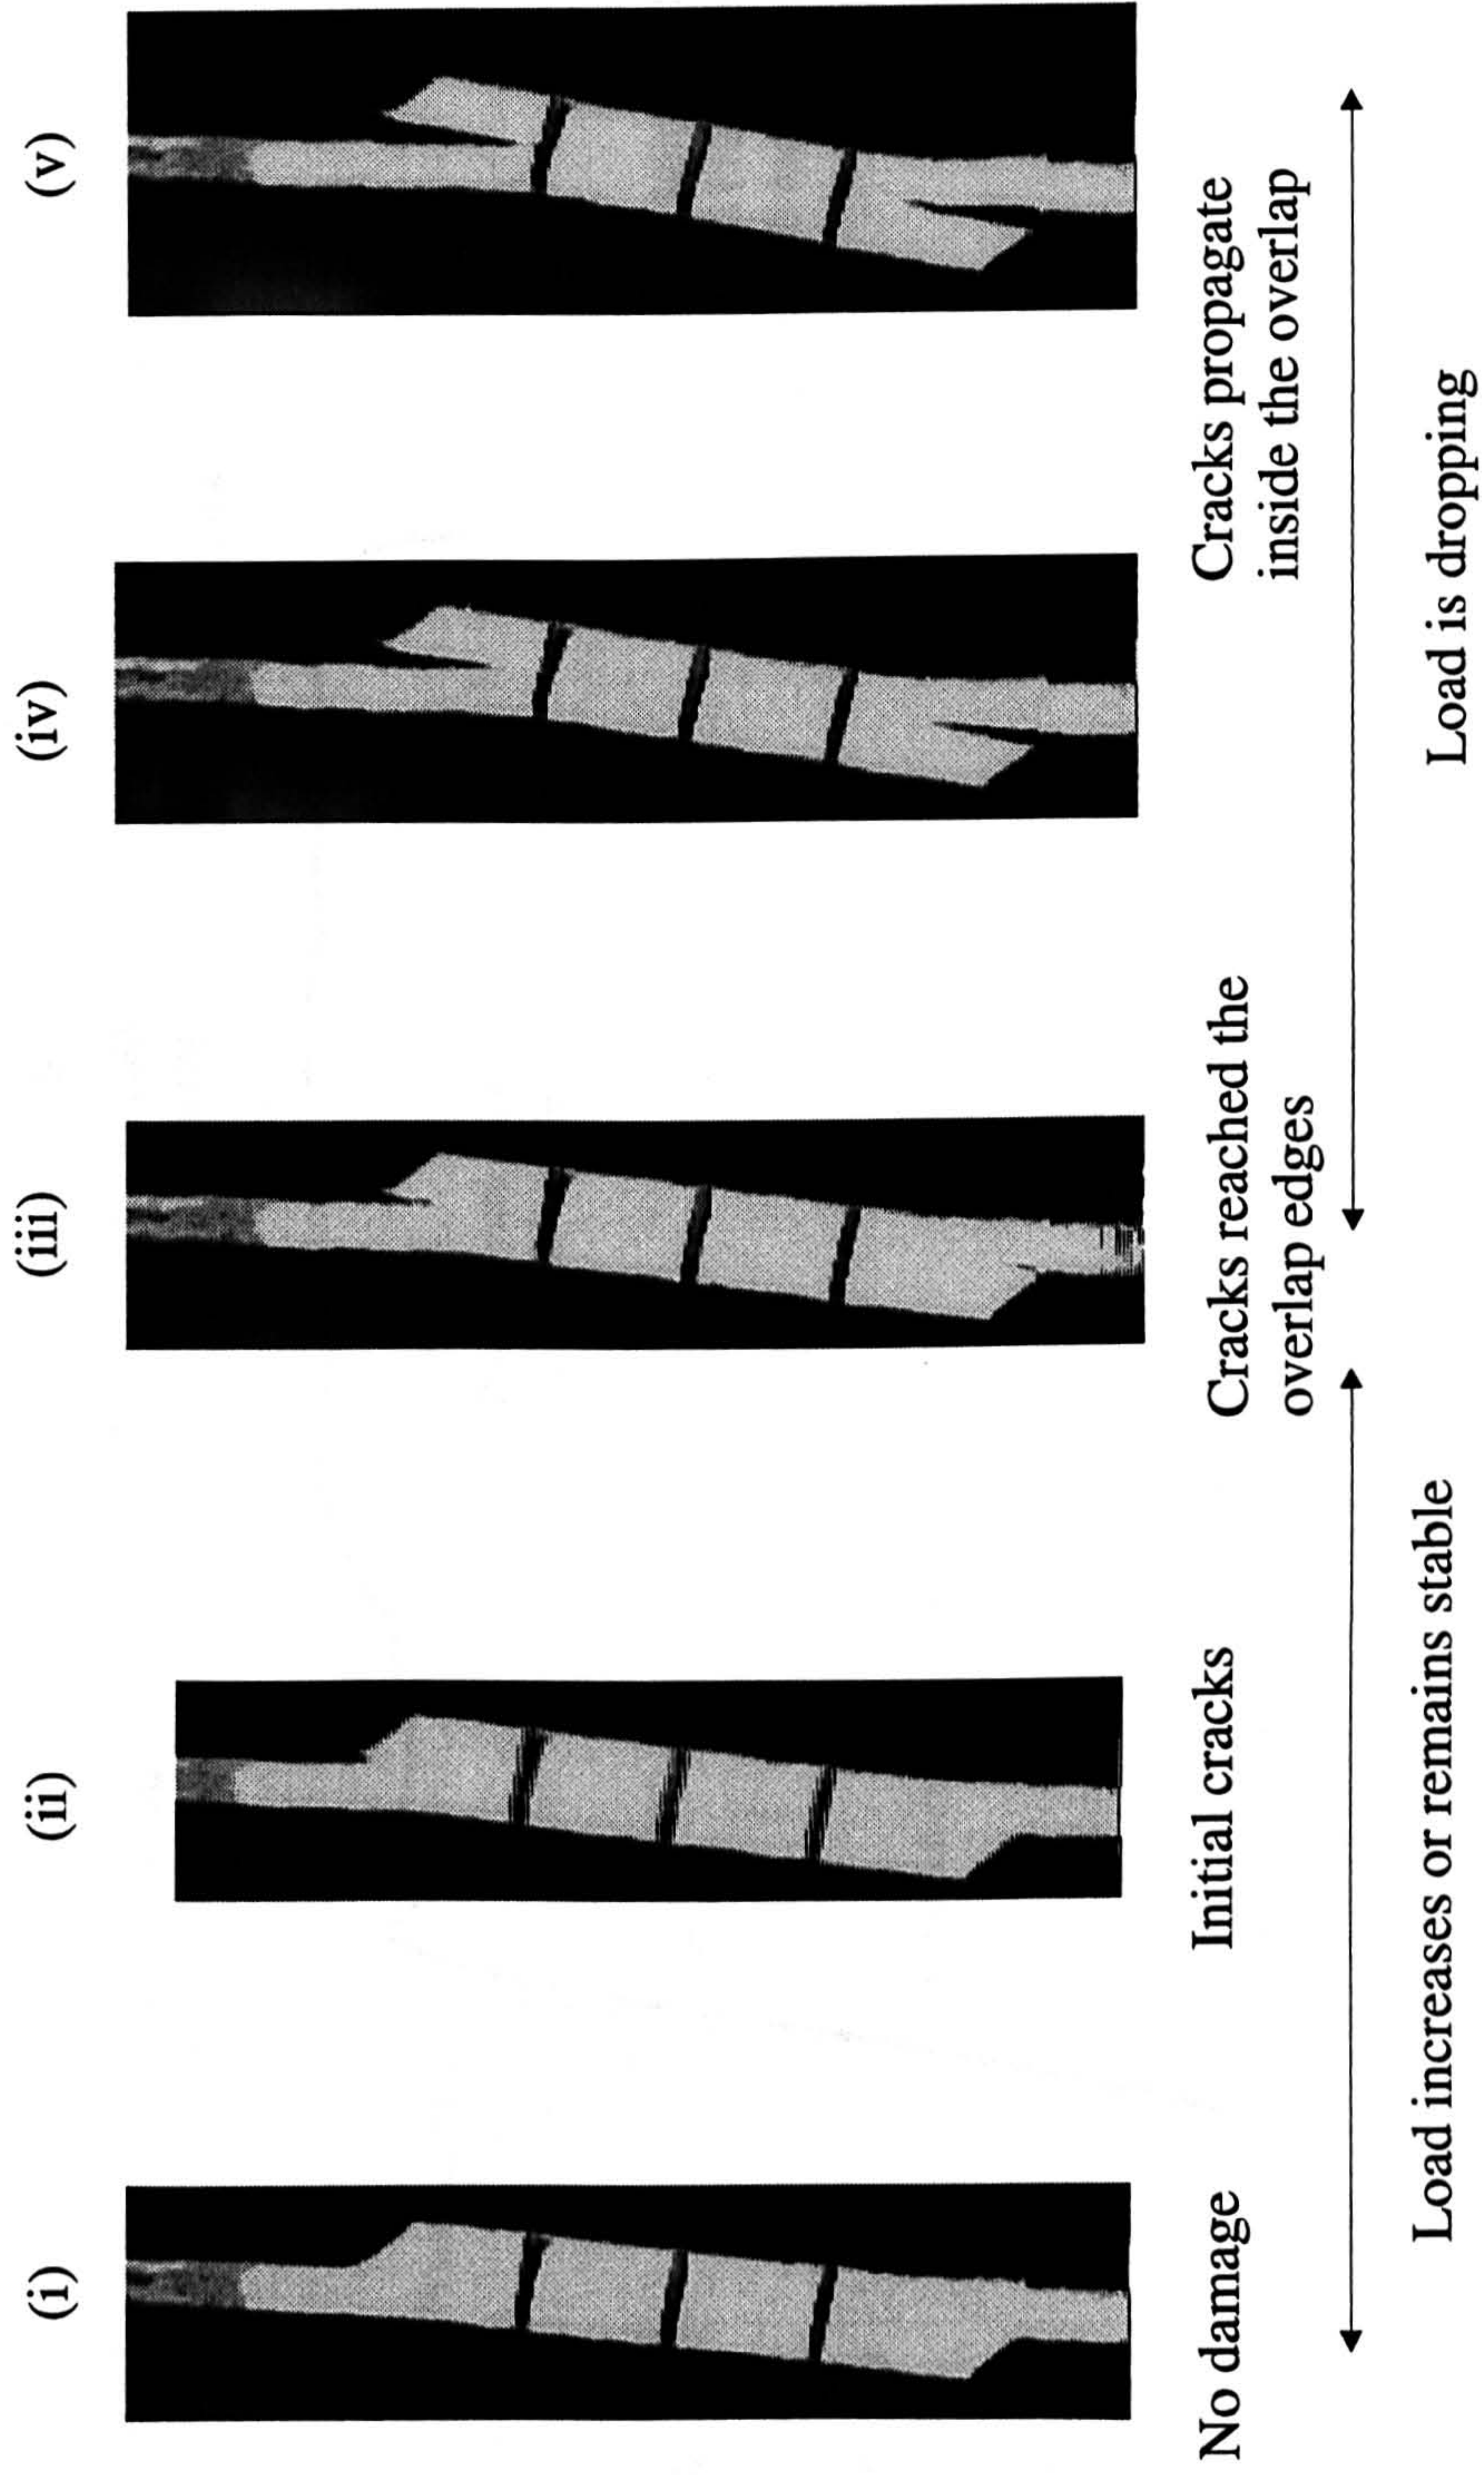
Failure propagation on a mild steel joint - AV 119 adhesive - 20 mm overlap
